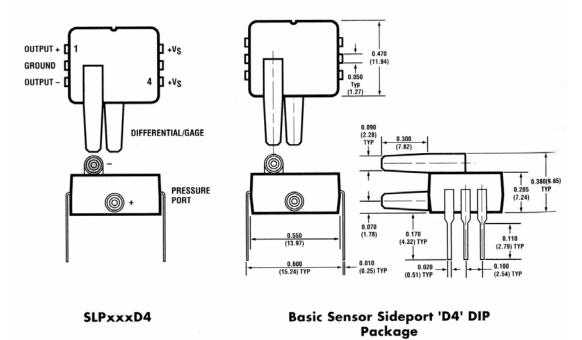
DIMENSIONAL DRAWING (FOR REFERENCE ONLY)
